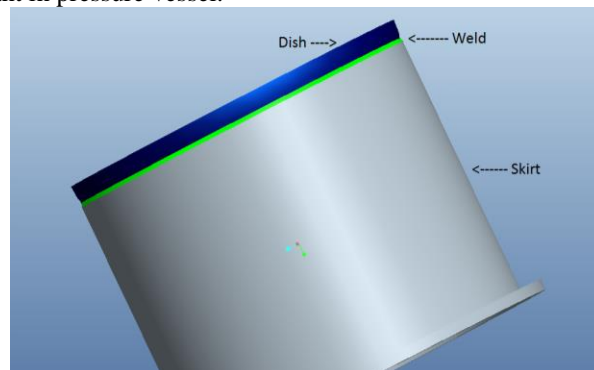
Dish To Shell Joint Assembly (Pro-E model)
